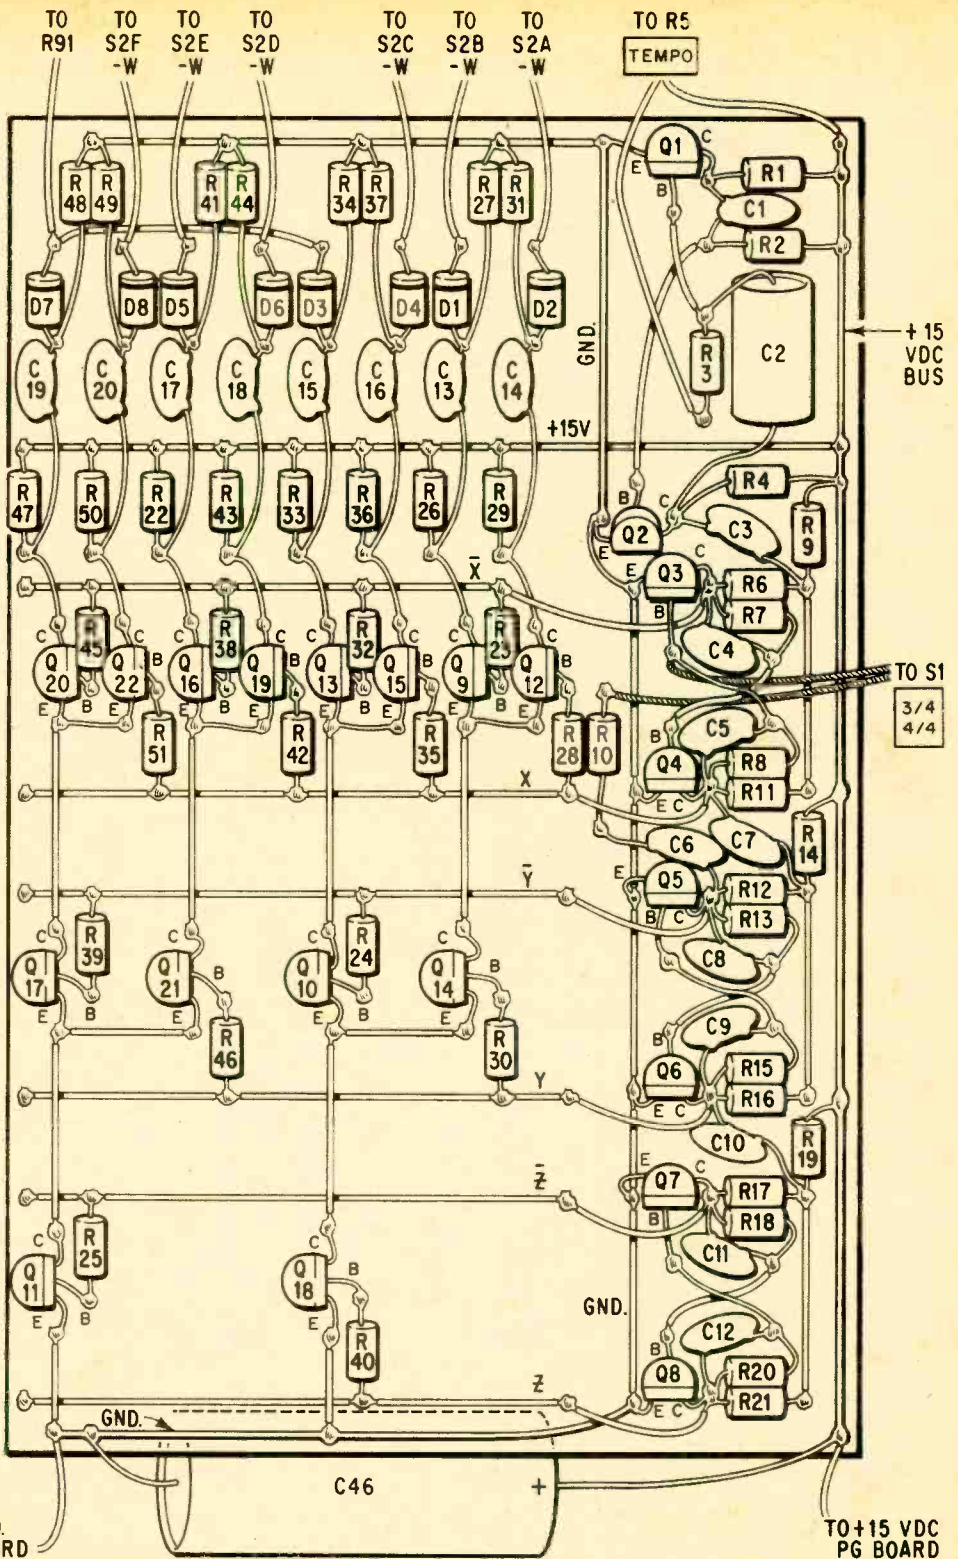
An 8½ x 5-in. perforated board contains Tempo Generator, Binary Counters as well as Decoder and Differentiators. Wiring will be tight so use spaghetti insulation generously or build on larger board.
